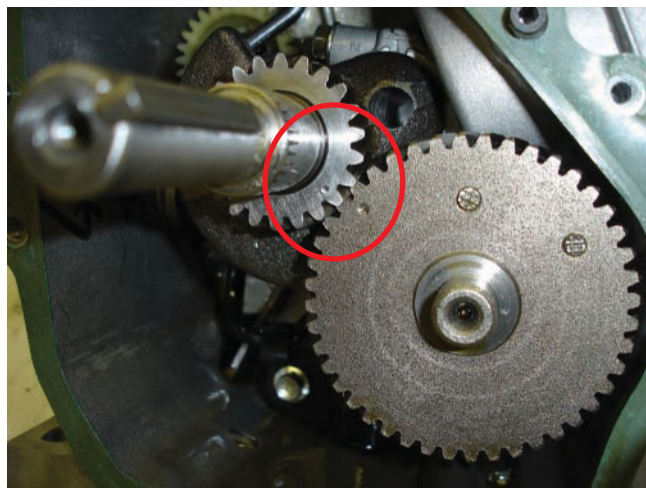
The camshaft timing marks are located generally on the crankshaft and the camshaft sprocket.
